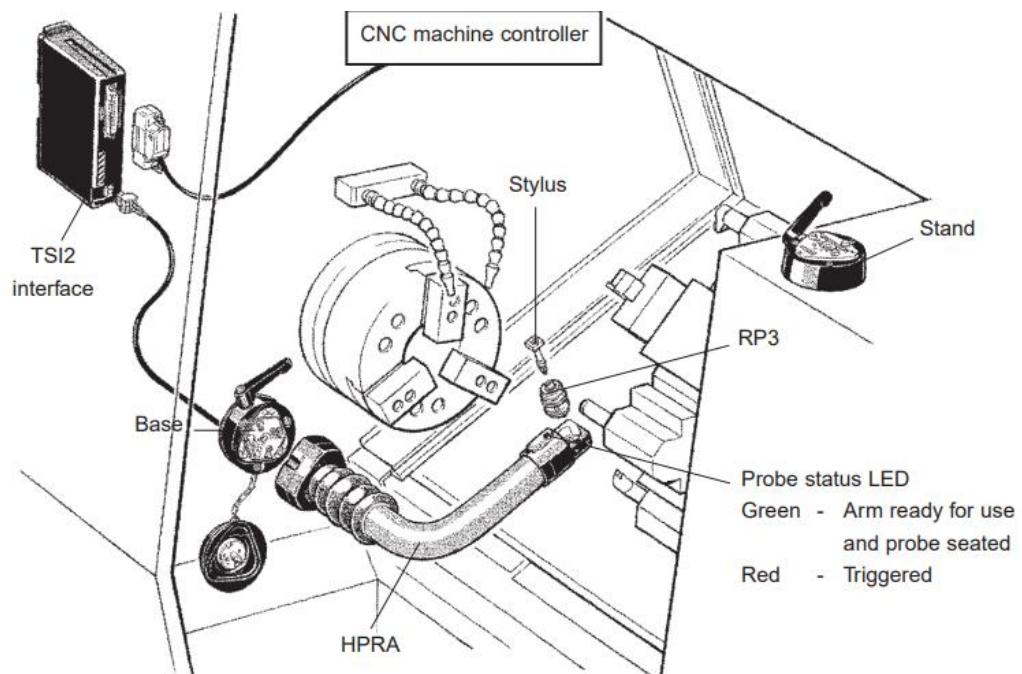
The Renishaw HRPA tool setting arm schematic drawing. [74]
